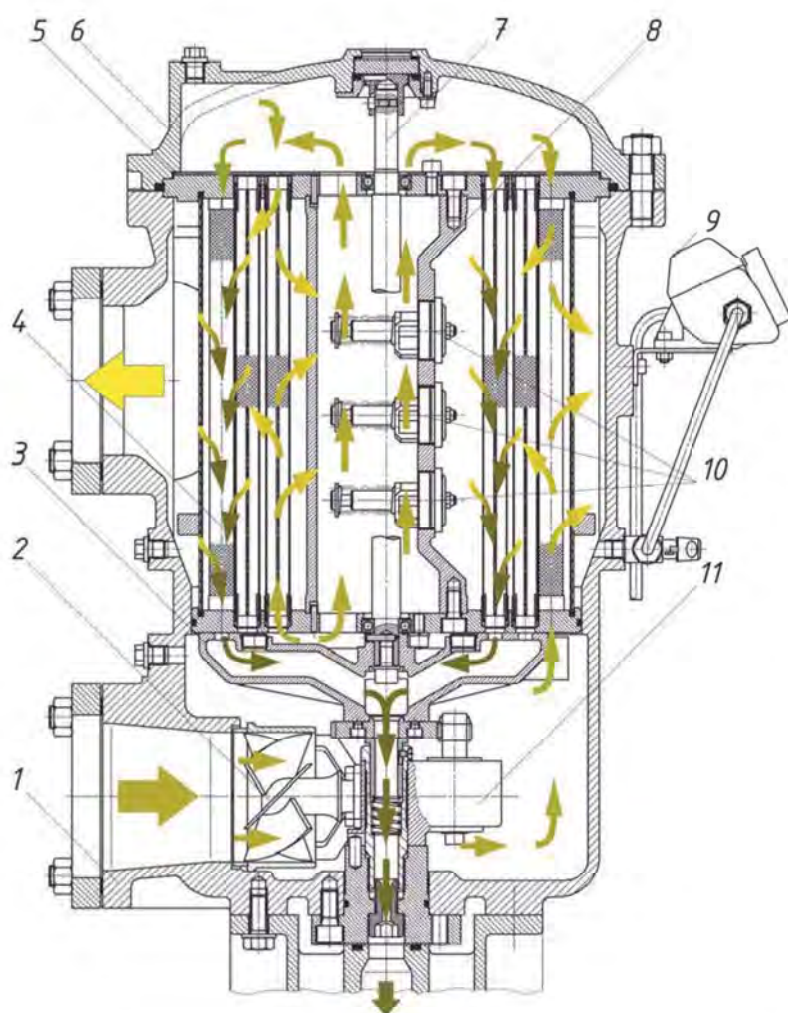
Automatic self-cleaning filter series 6.46 from Boll Filters: 1 – filter housing; 2 – drive impeller; 3 – sludge collection support; 4 – filter elements; 5 – top board; 6 – filter cover; 7 – axis of rotation of the caliper; 8 – diaphragm; 9 – control panel; 10 – bypass valves; 11 – caliper drive gearbox (adapted from [8])
